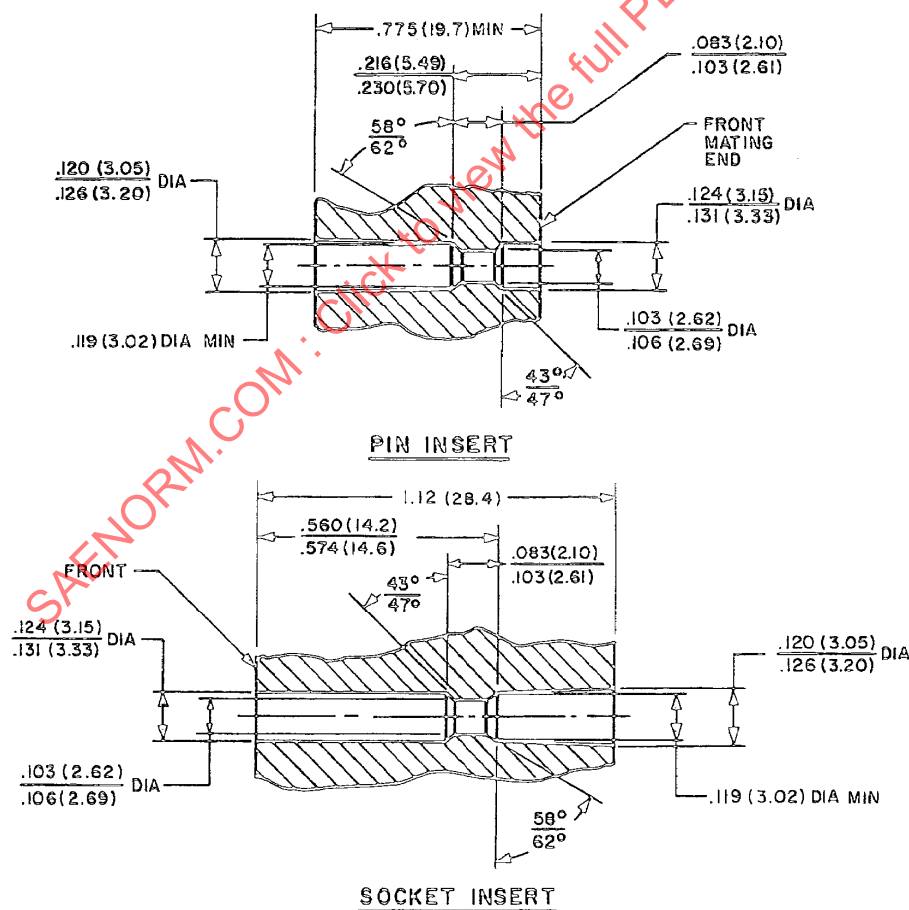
INSERT HOLE CONFIGURATION (CONTACT SIZE 16-16, 16-20 AND 16-24).
